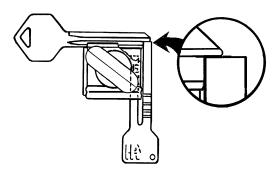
The Wing Nut and Top Jaw of the vise partially removed to show a top view of the Bottom Jaw only, for key positioning and Tip Stop settings.
